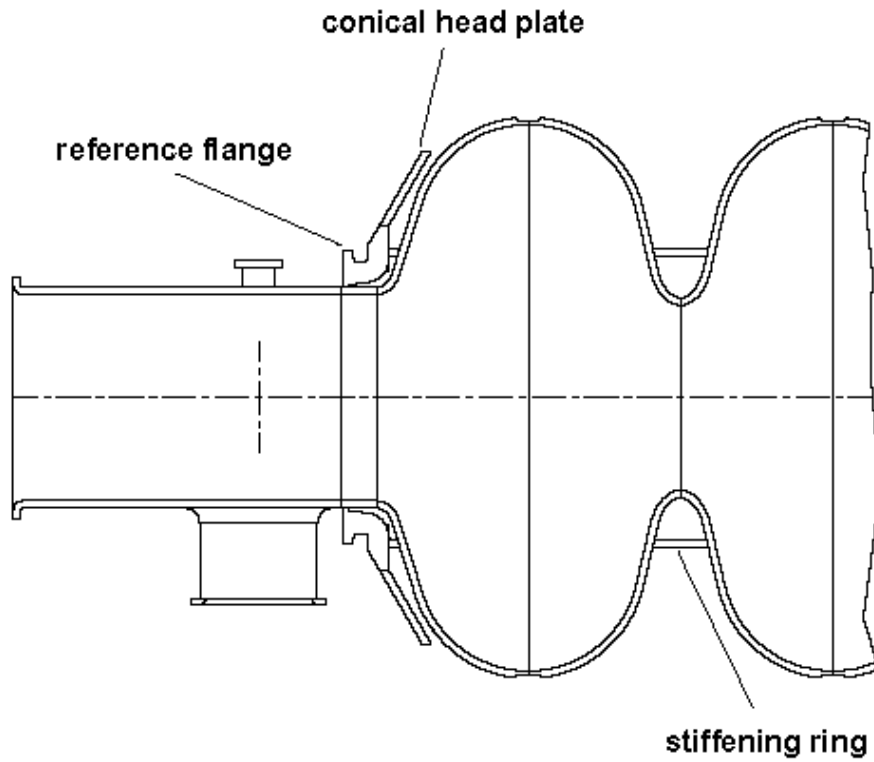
Sketch of the TTF cavity: stiffening ring, reference flange and conical head plate are shown.
